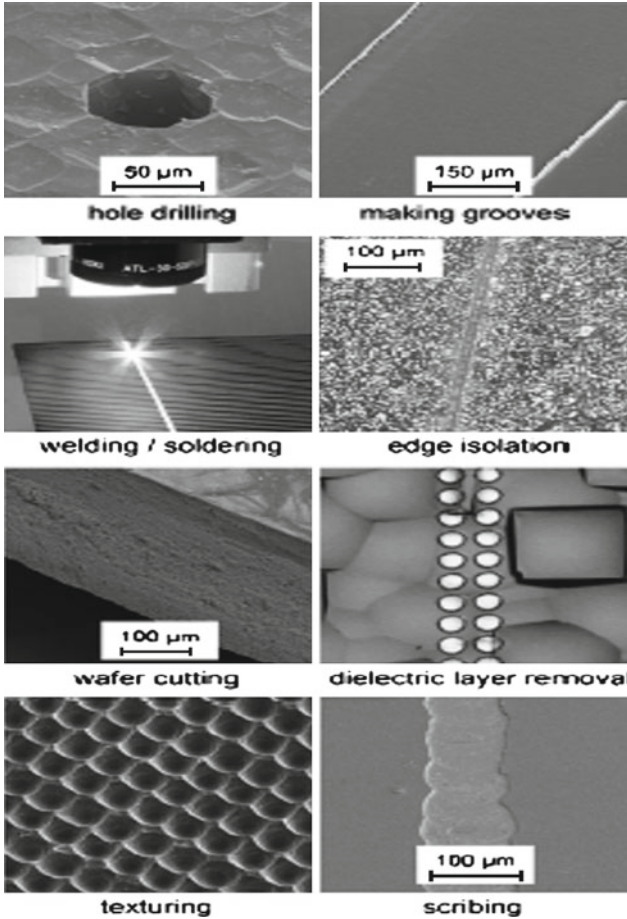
Laser applications for solar-cell production: hole drilling of back-contact solar cells with pulsed fiber laser, SiO₂ removal for groove production, laser welding / soldering of contacts, edge isolation, wafer cutting, removal of dielectric layers for improved contact performance, texturing to increase the absorption of sunlight and therefore to enhance the efficiency of the cell, and scribing of thin-film cells [131]
